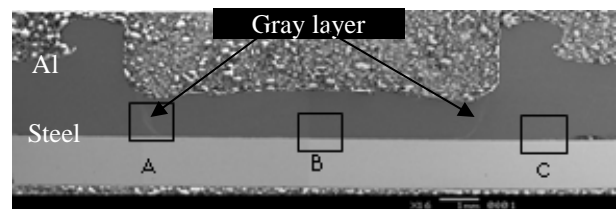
Macroscopic appearance of the cross-section of the weld zone
